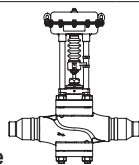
with butt weld ends Pressure balanced plug Spring closes on air failure
